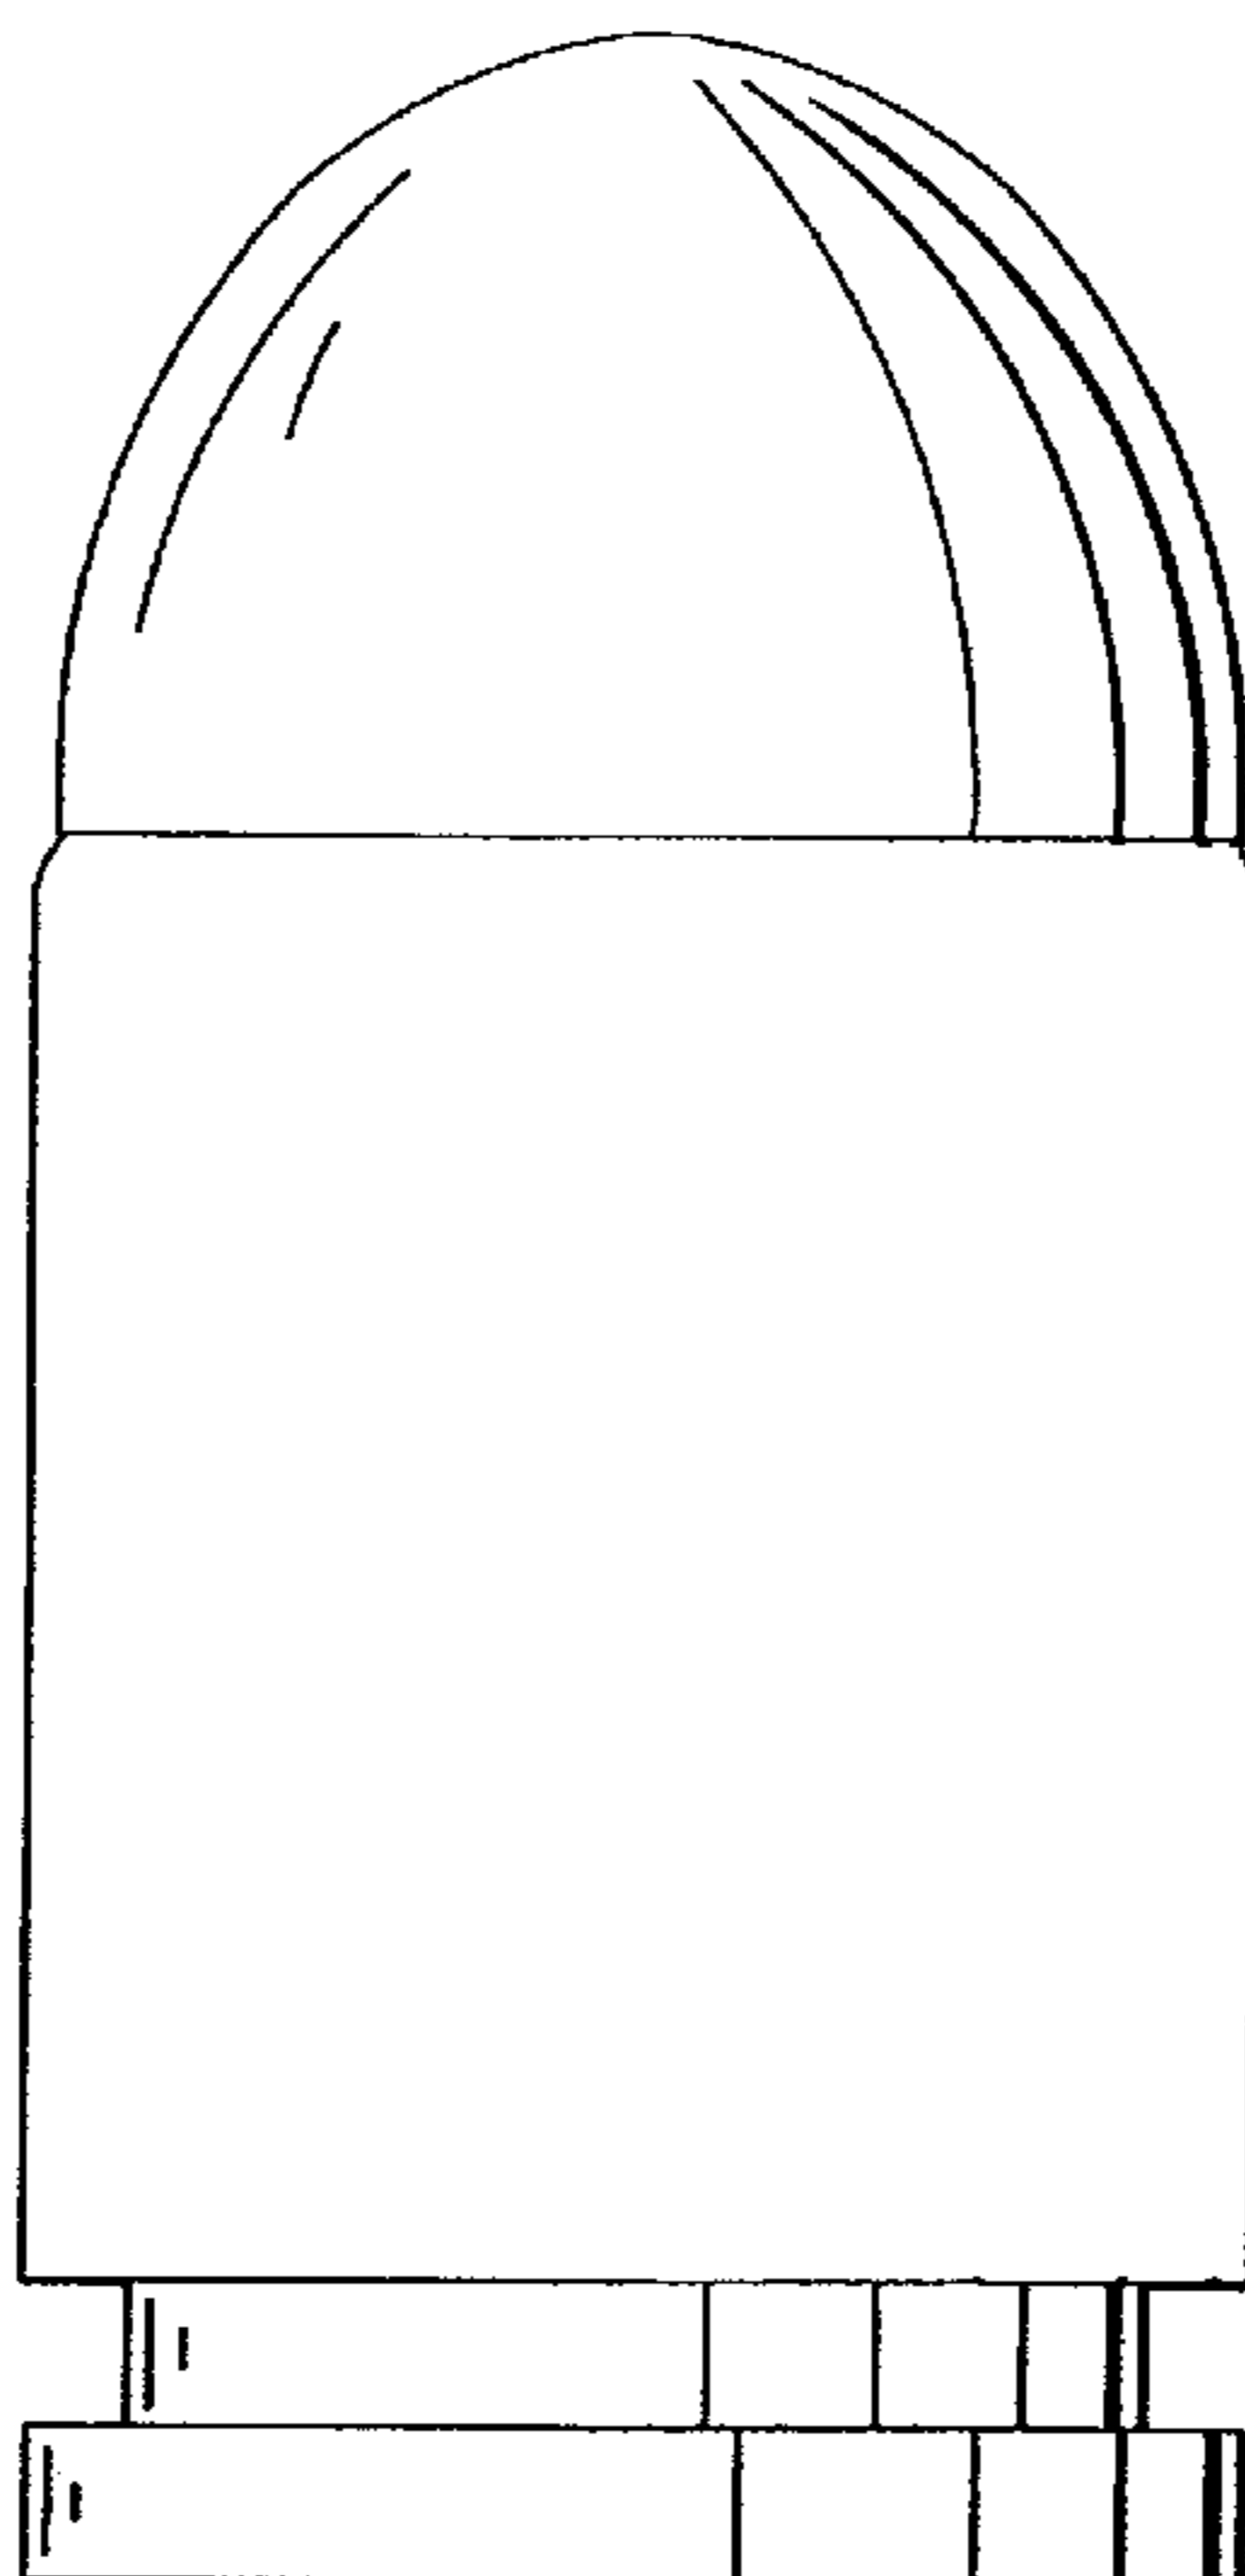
is a front elevation view of the bullet-shaped beverage container shown in FIG. 1;
